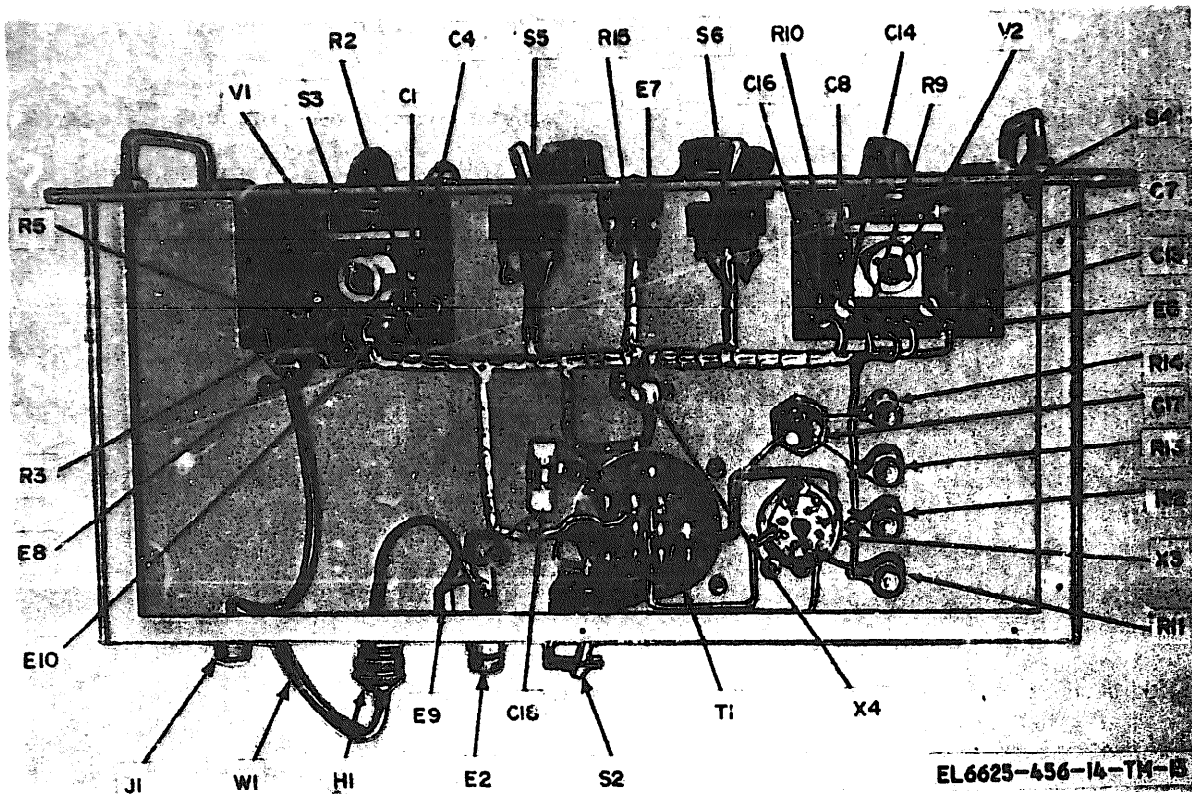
TS683/TSM panel and chassis assembly, cover plate removed, bottom view.
